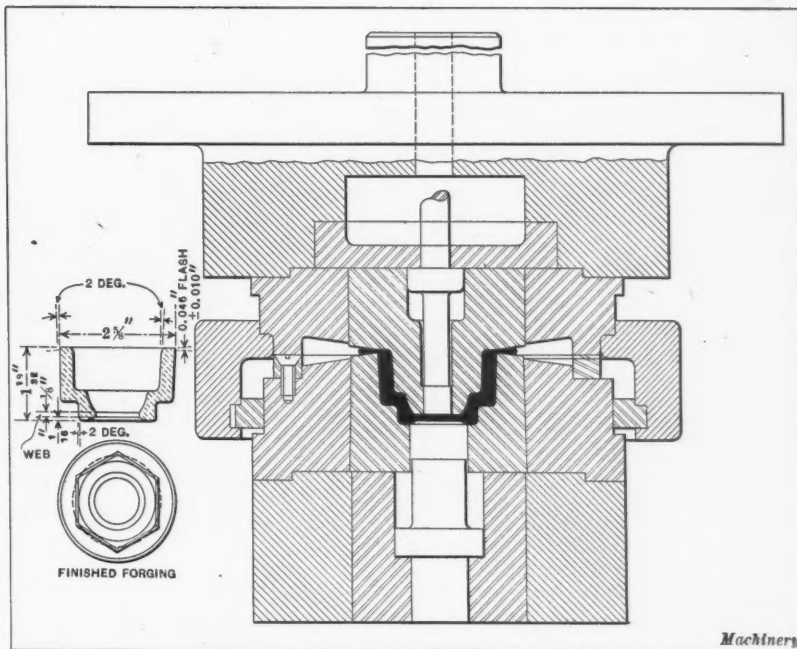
Single-action Dies for forging Bronze Change-speed Lever Ball Sockets
